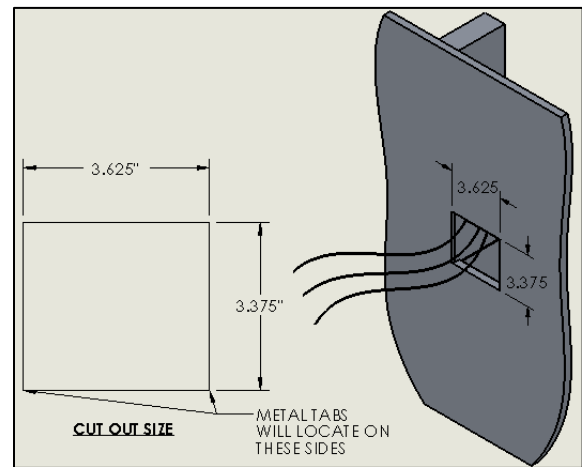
J-BOX ASSEMBLY AND WALL CUT OUT
